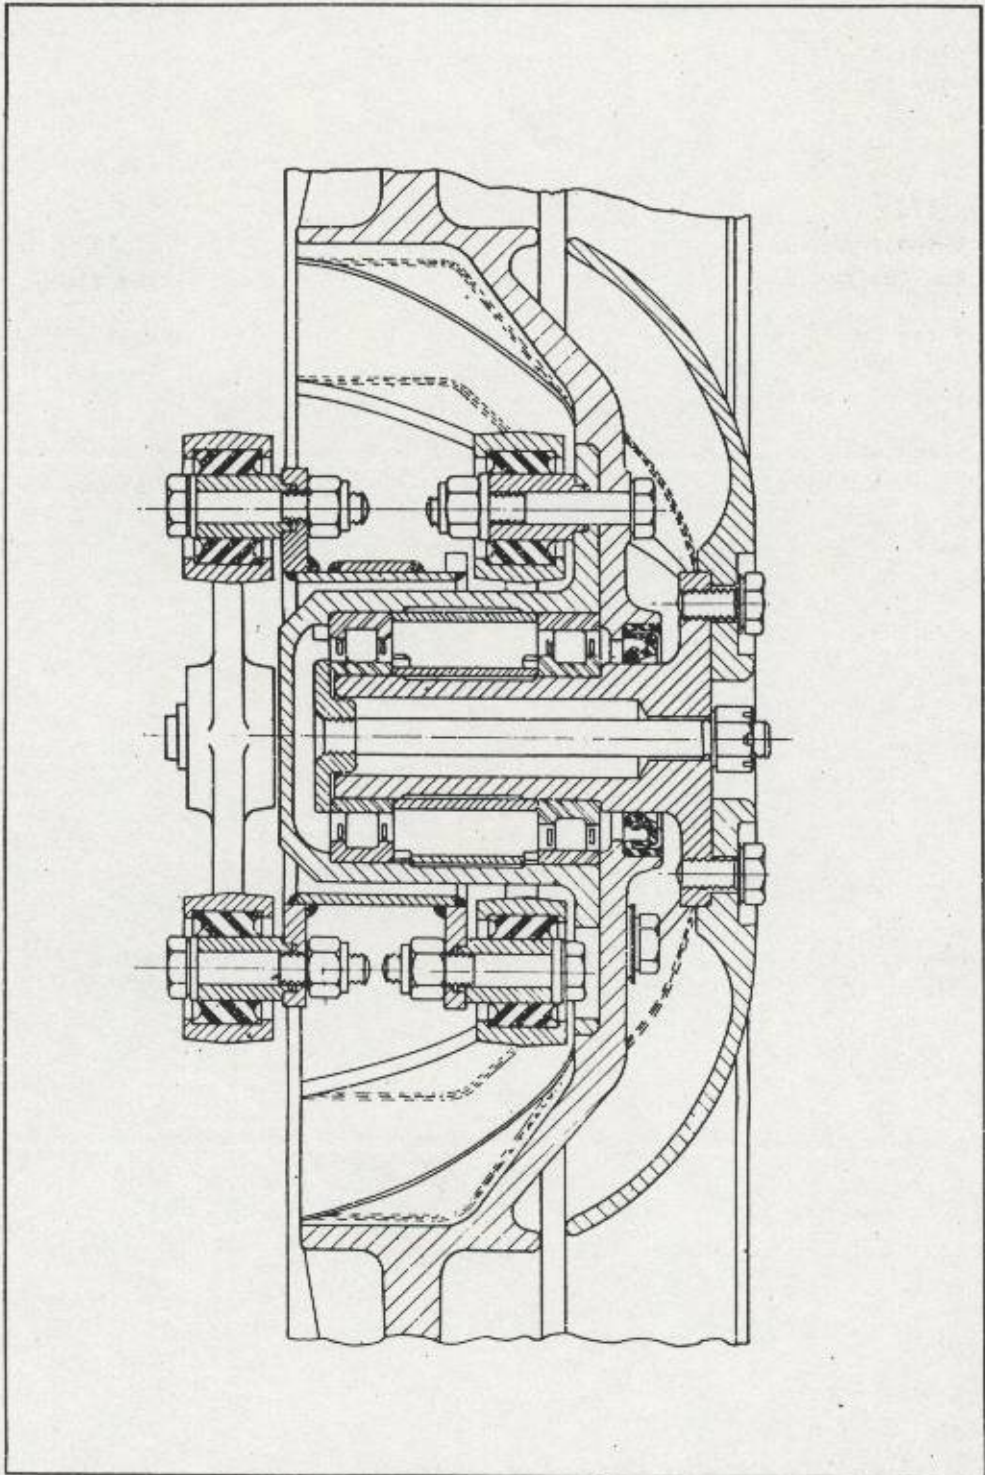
COOLANT FAN - GENERAL ARRANGEMENT
